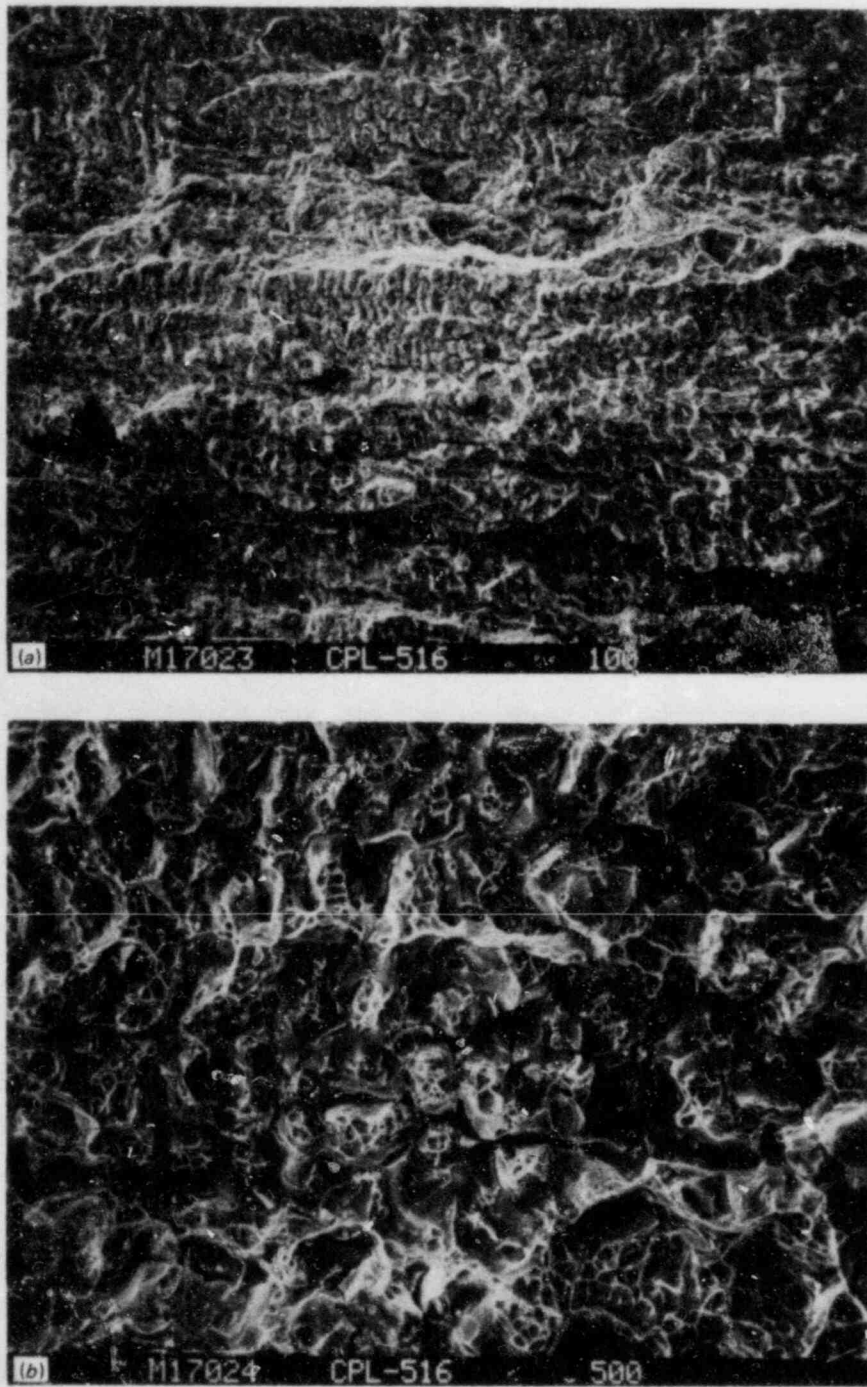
Detailed views of type 308 weld metal fracture surface of specimen CPL-516 showing mixed mode fracture. (a) 100 $\times$  and (b) 500 $\times$ .
